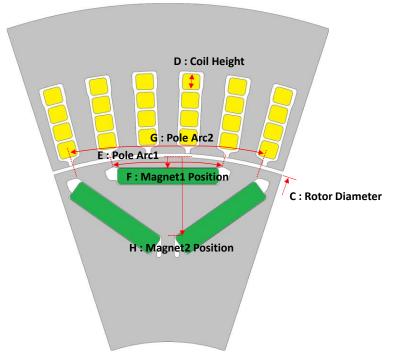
Initial improved design of machine and design variable for machine geometry.
